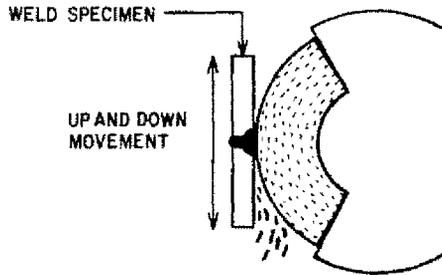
Method of grinding the weld of the test specimen.
